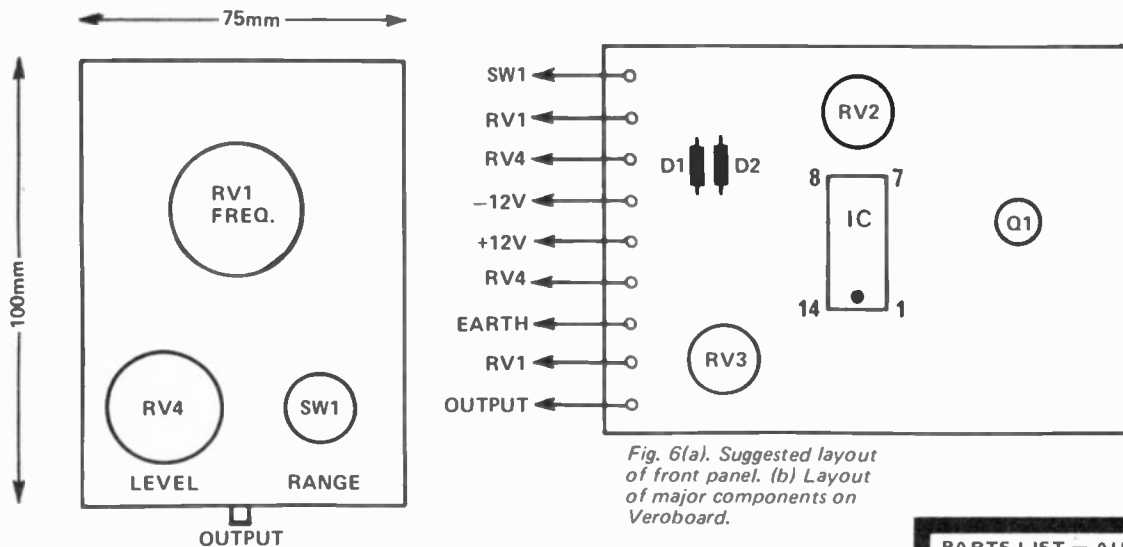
(a). Suggested layout of front panel. (b) Layout of major components on Veroboard.
